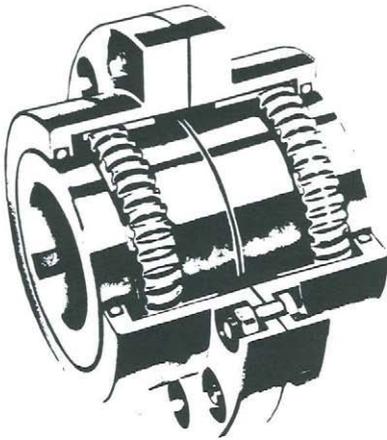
Gear tooth coupling (grease packed) (Courtesy of Zurn Industries)
